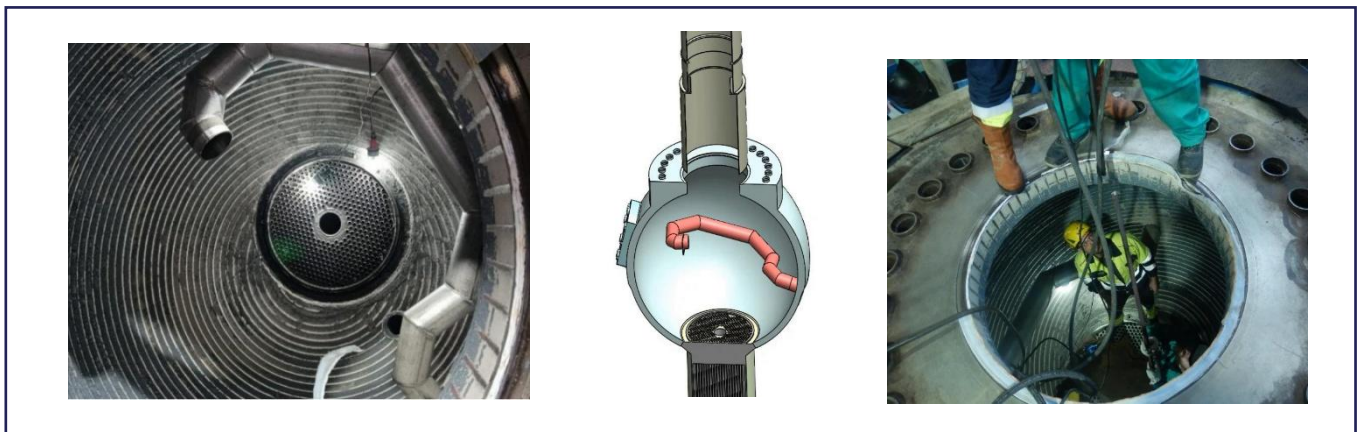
Full access to the top tube sheet for removal and re-installation of the heat exchanger tubes.
